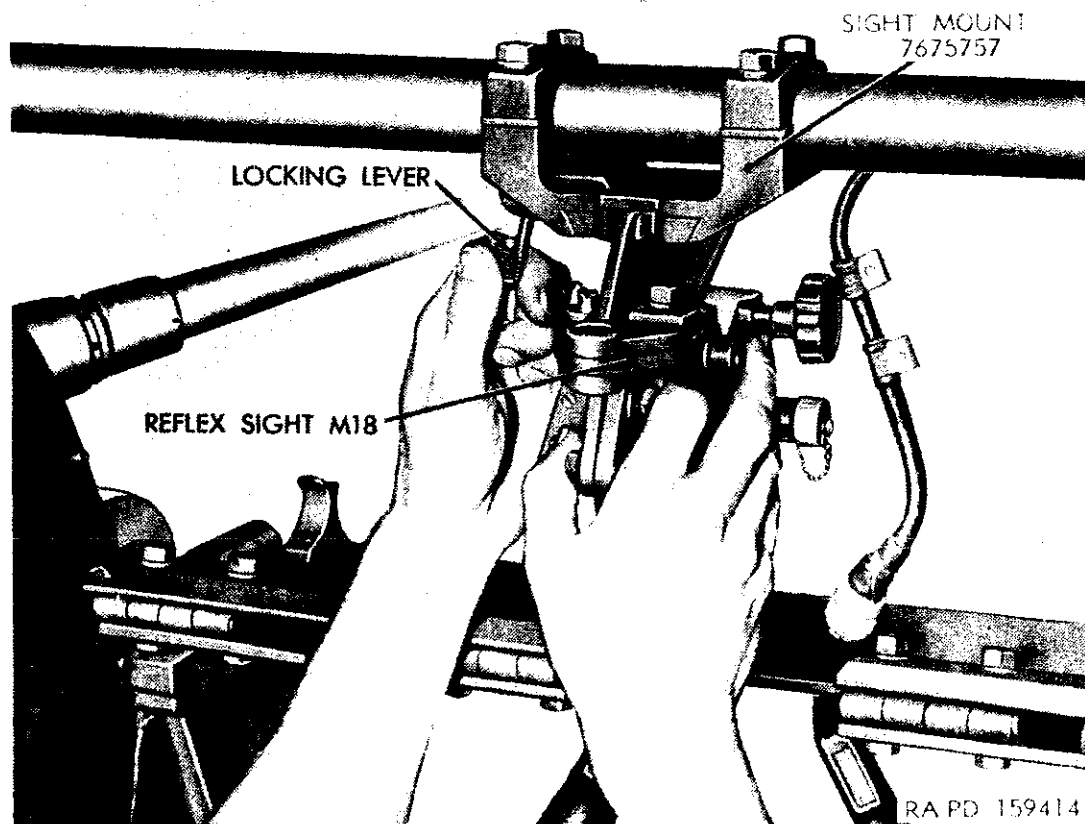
Installing reflex sight M18 in sight mount 7675757.
